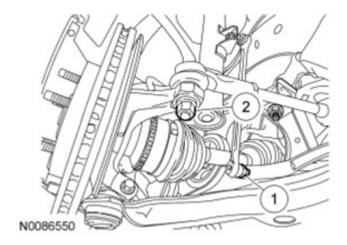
Identifying Stabilizer Bar Link And Retaining Nut Courtesy of FORD MOTOR CO.
